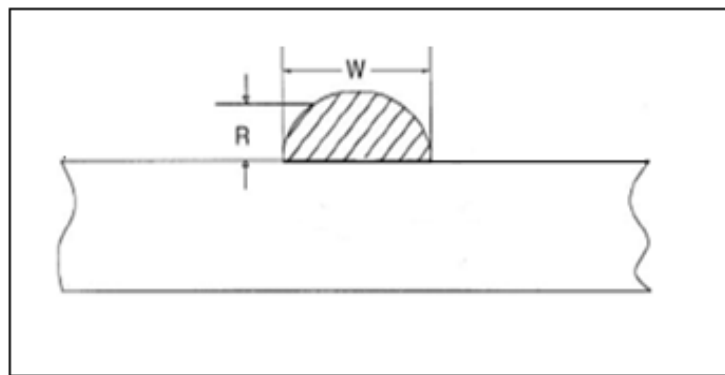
Cross-Sectional of weld bead,where W be weld width in mm, R be the Reinforcement in mm.
